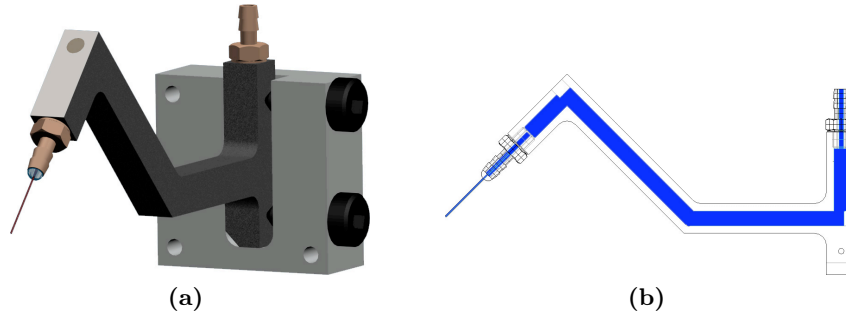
Vacuum gripper assembly (a) and cross-sectional view of the flow path (b).
